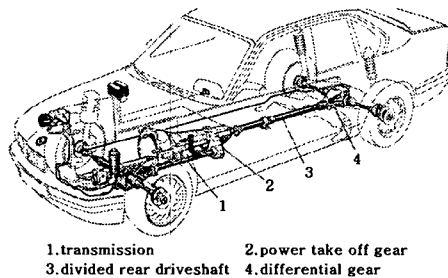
Schematic diagram of the driveshaft for a rear wheel drive automobile.
